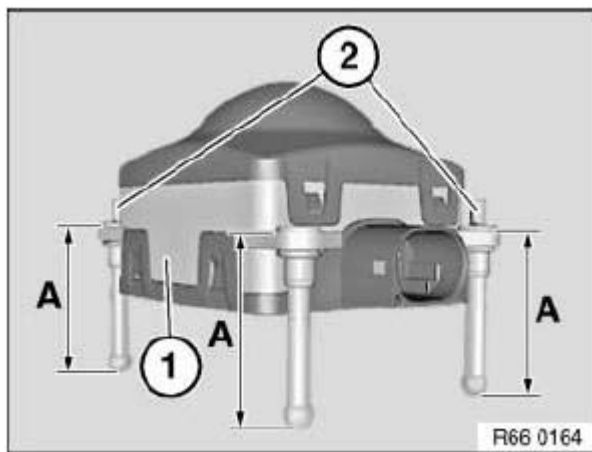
Identifying ACC Sensor And Adjusting Screws Measurement
